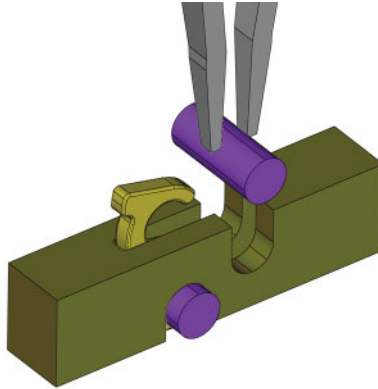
REMOVE THE DEVICE SIDE ELASTOMER.
